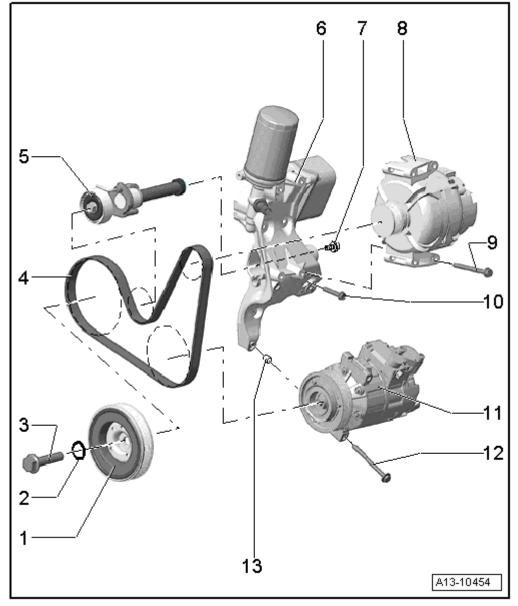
Identifying Ribbed Belt Drive Assembly Overview Courtesy of VOLKSWAGEN UNITED STATES, INC.
